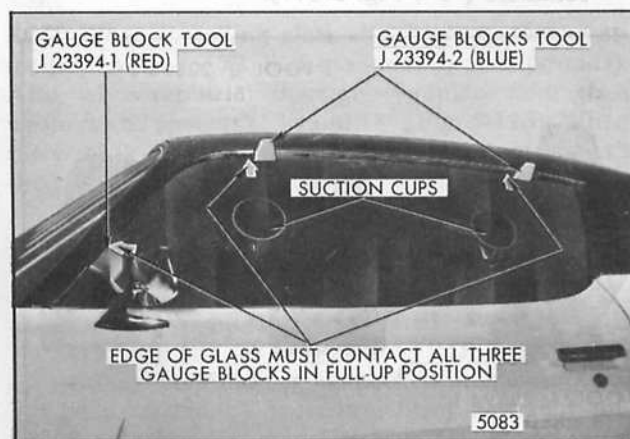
Door Window - Fore and Aft Alignment - "F" Styles
